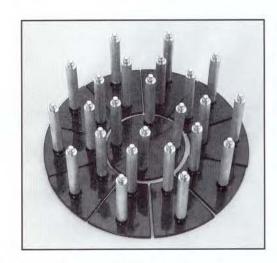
Plugs with Stems are shown when Knife Blade Assembly (Fig. 8) is removed. Notice 2 different circles of Plugs.
